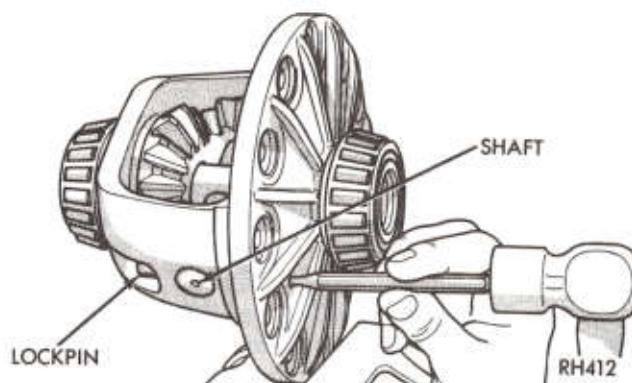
Removing Differential Pinion Shaft Lockpin (Typical)
